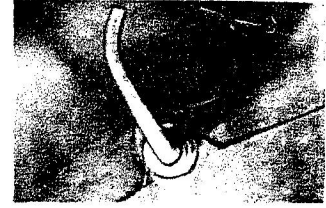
End of Valve Burred - Can Be Rethreaded. Valve Bent - Can Be Straightened
